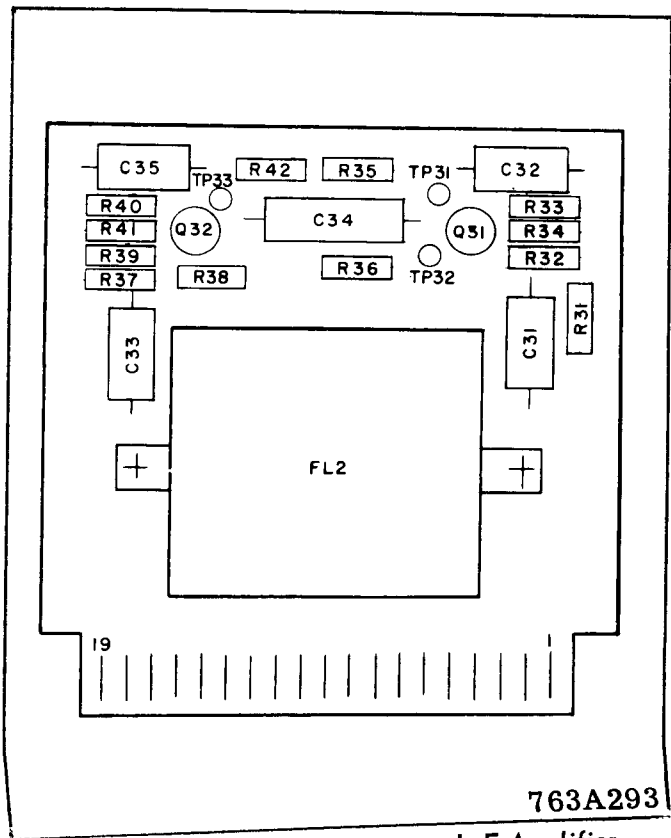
Component Locations on I-F Amplifier Printed Circuit Board.
